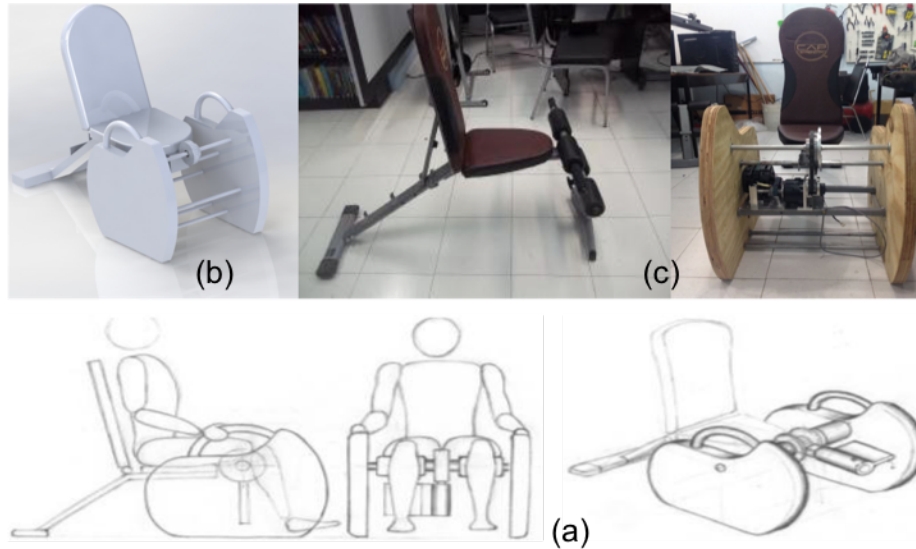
Stages of design (a) Design on freehand drawings, (b) Computer design (c) ROBMMOR prototype.
